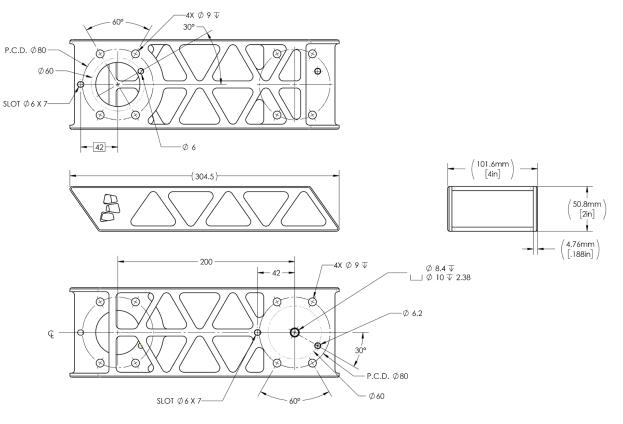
Technical Dimensions of the 200 mm Hollow Offset Link
